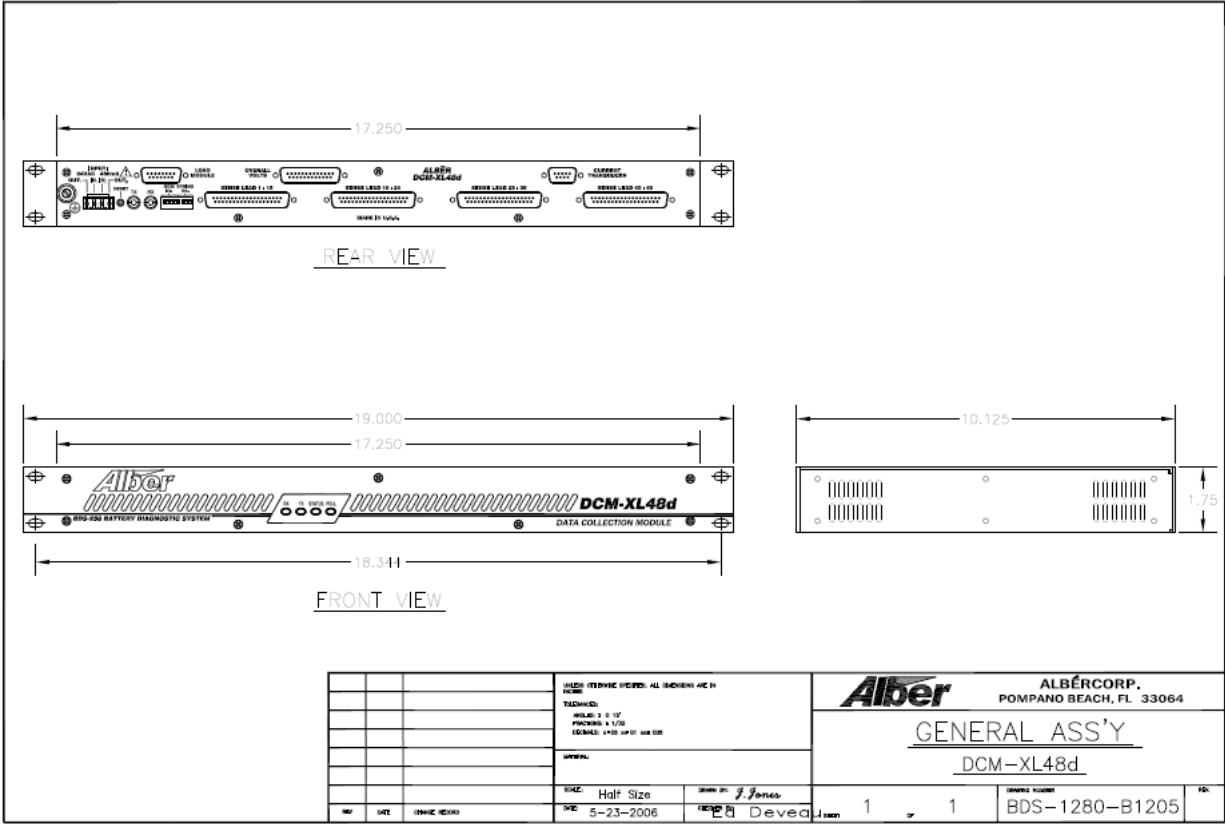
BDS-256XL Front and Rear View General Assembly DCM-XL48d Drawing
